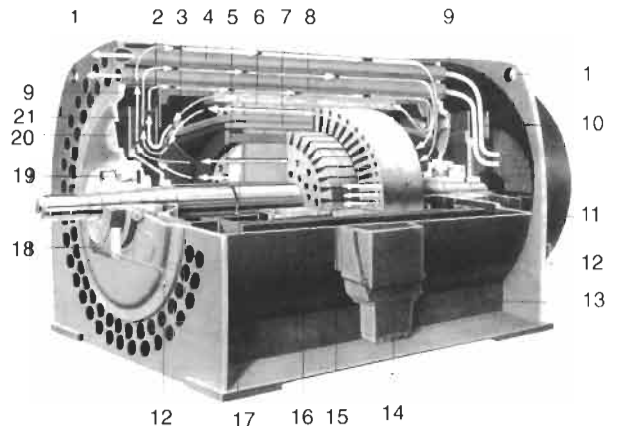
(c) Cross-sectional view of a large tube-ventilated squirrel cage motor showing the cooling circuit (Cooling system IC5A1A1) (Courtesy: NGEF Ltd)
